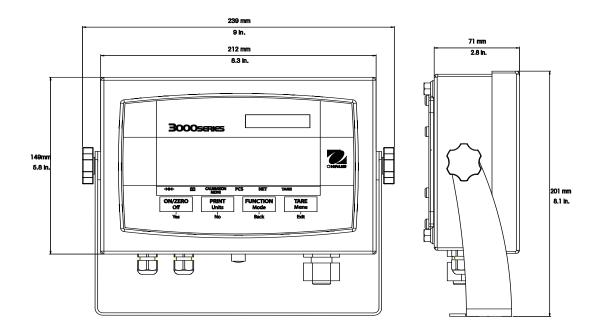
Indicator Overall Dimensions with Mounting Bracket.
